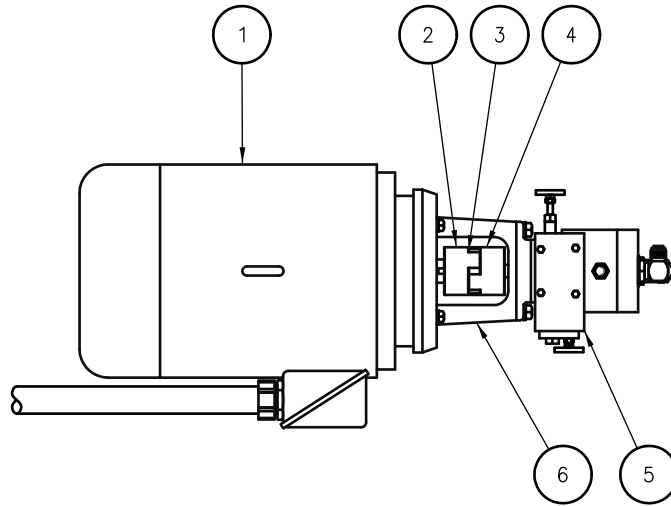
Electric Motor/Hydraulic Pump Assembly
